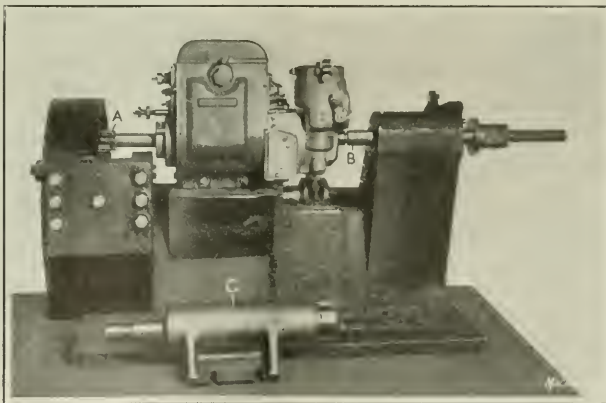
Running-in Gage for testing Installation Conditions of a Motor Generator
